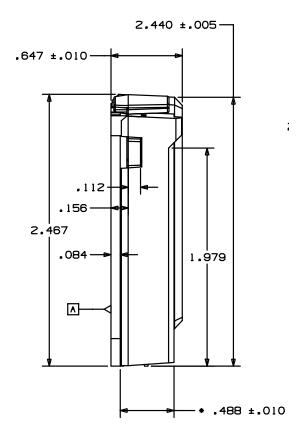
AMD Athlon™ Processor Module Dimensions – Side View
